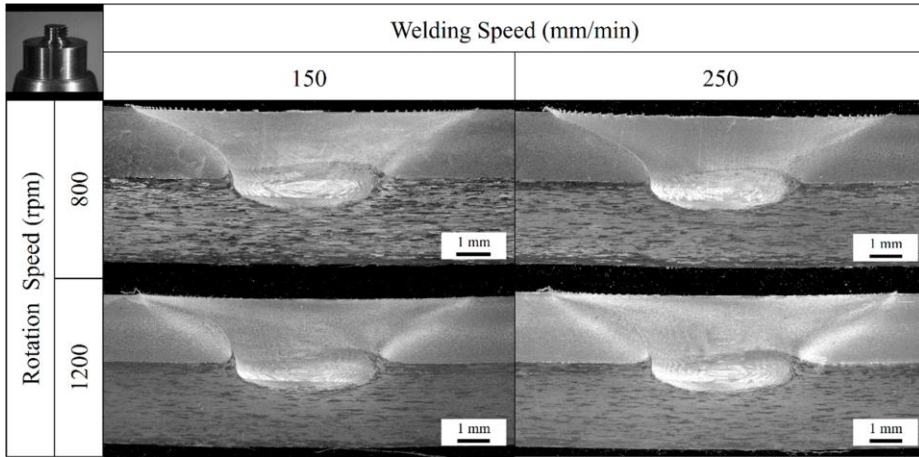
Cross-section and microstructural zones of a friction stir welding (FSW) lap joint produced using a conventional threaded tool (Reproduced from [3])
